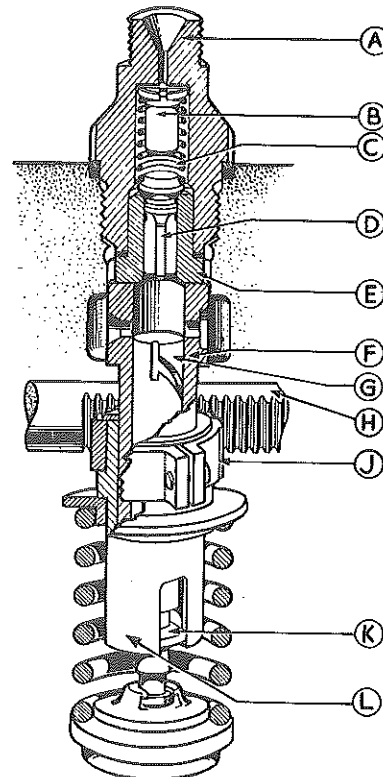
SECTION THROUGH FUEL PUMP ELEMENT
